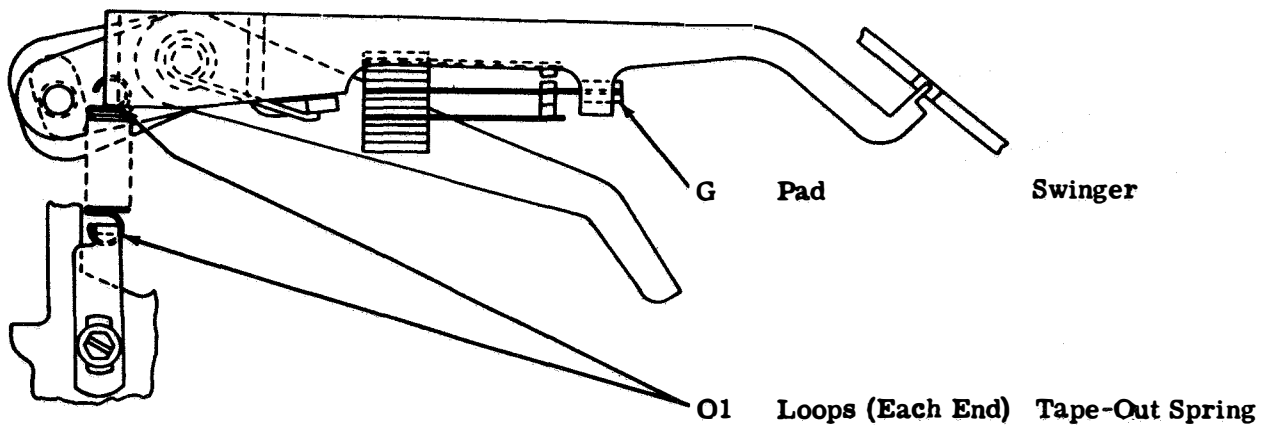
Tape-Out Sensing Mechanism, Front View
